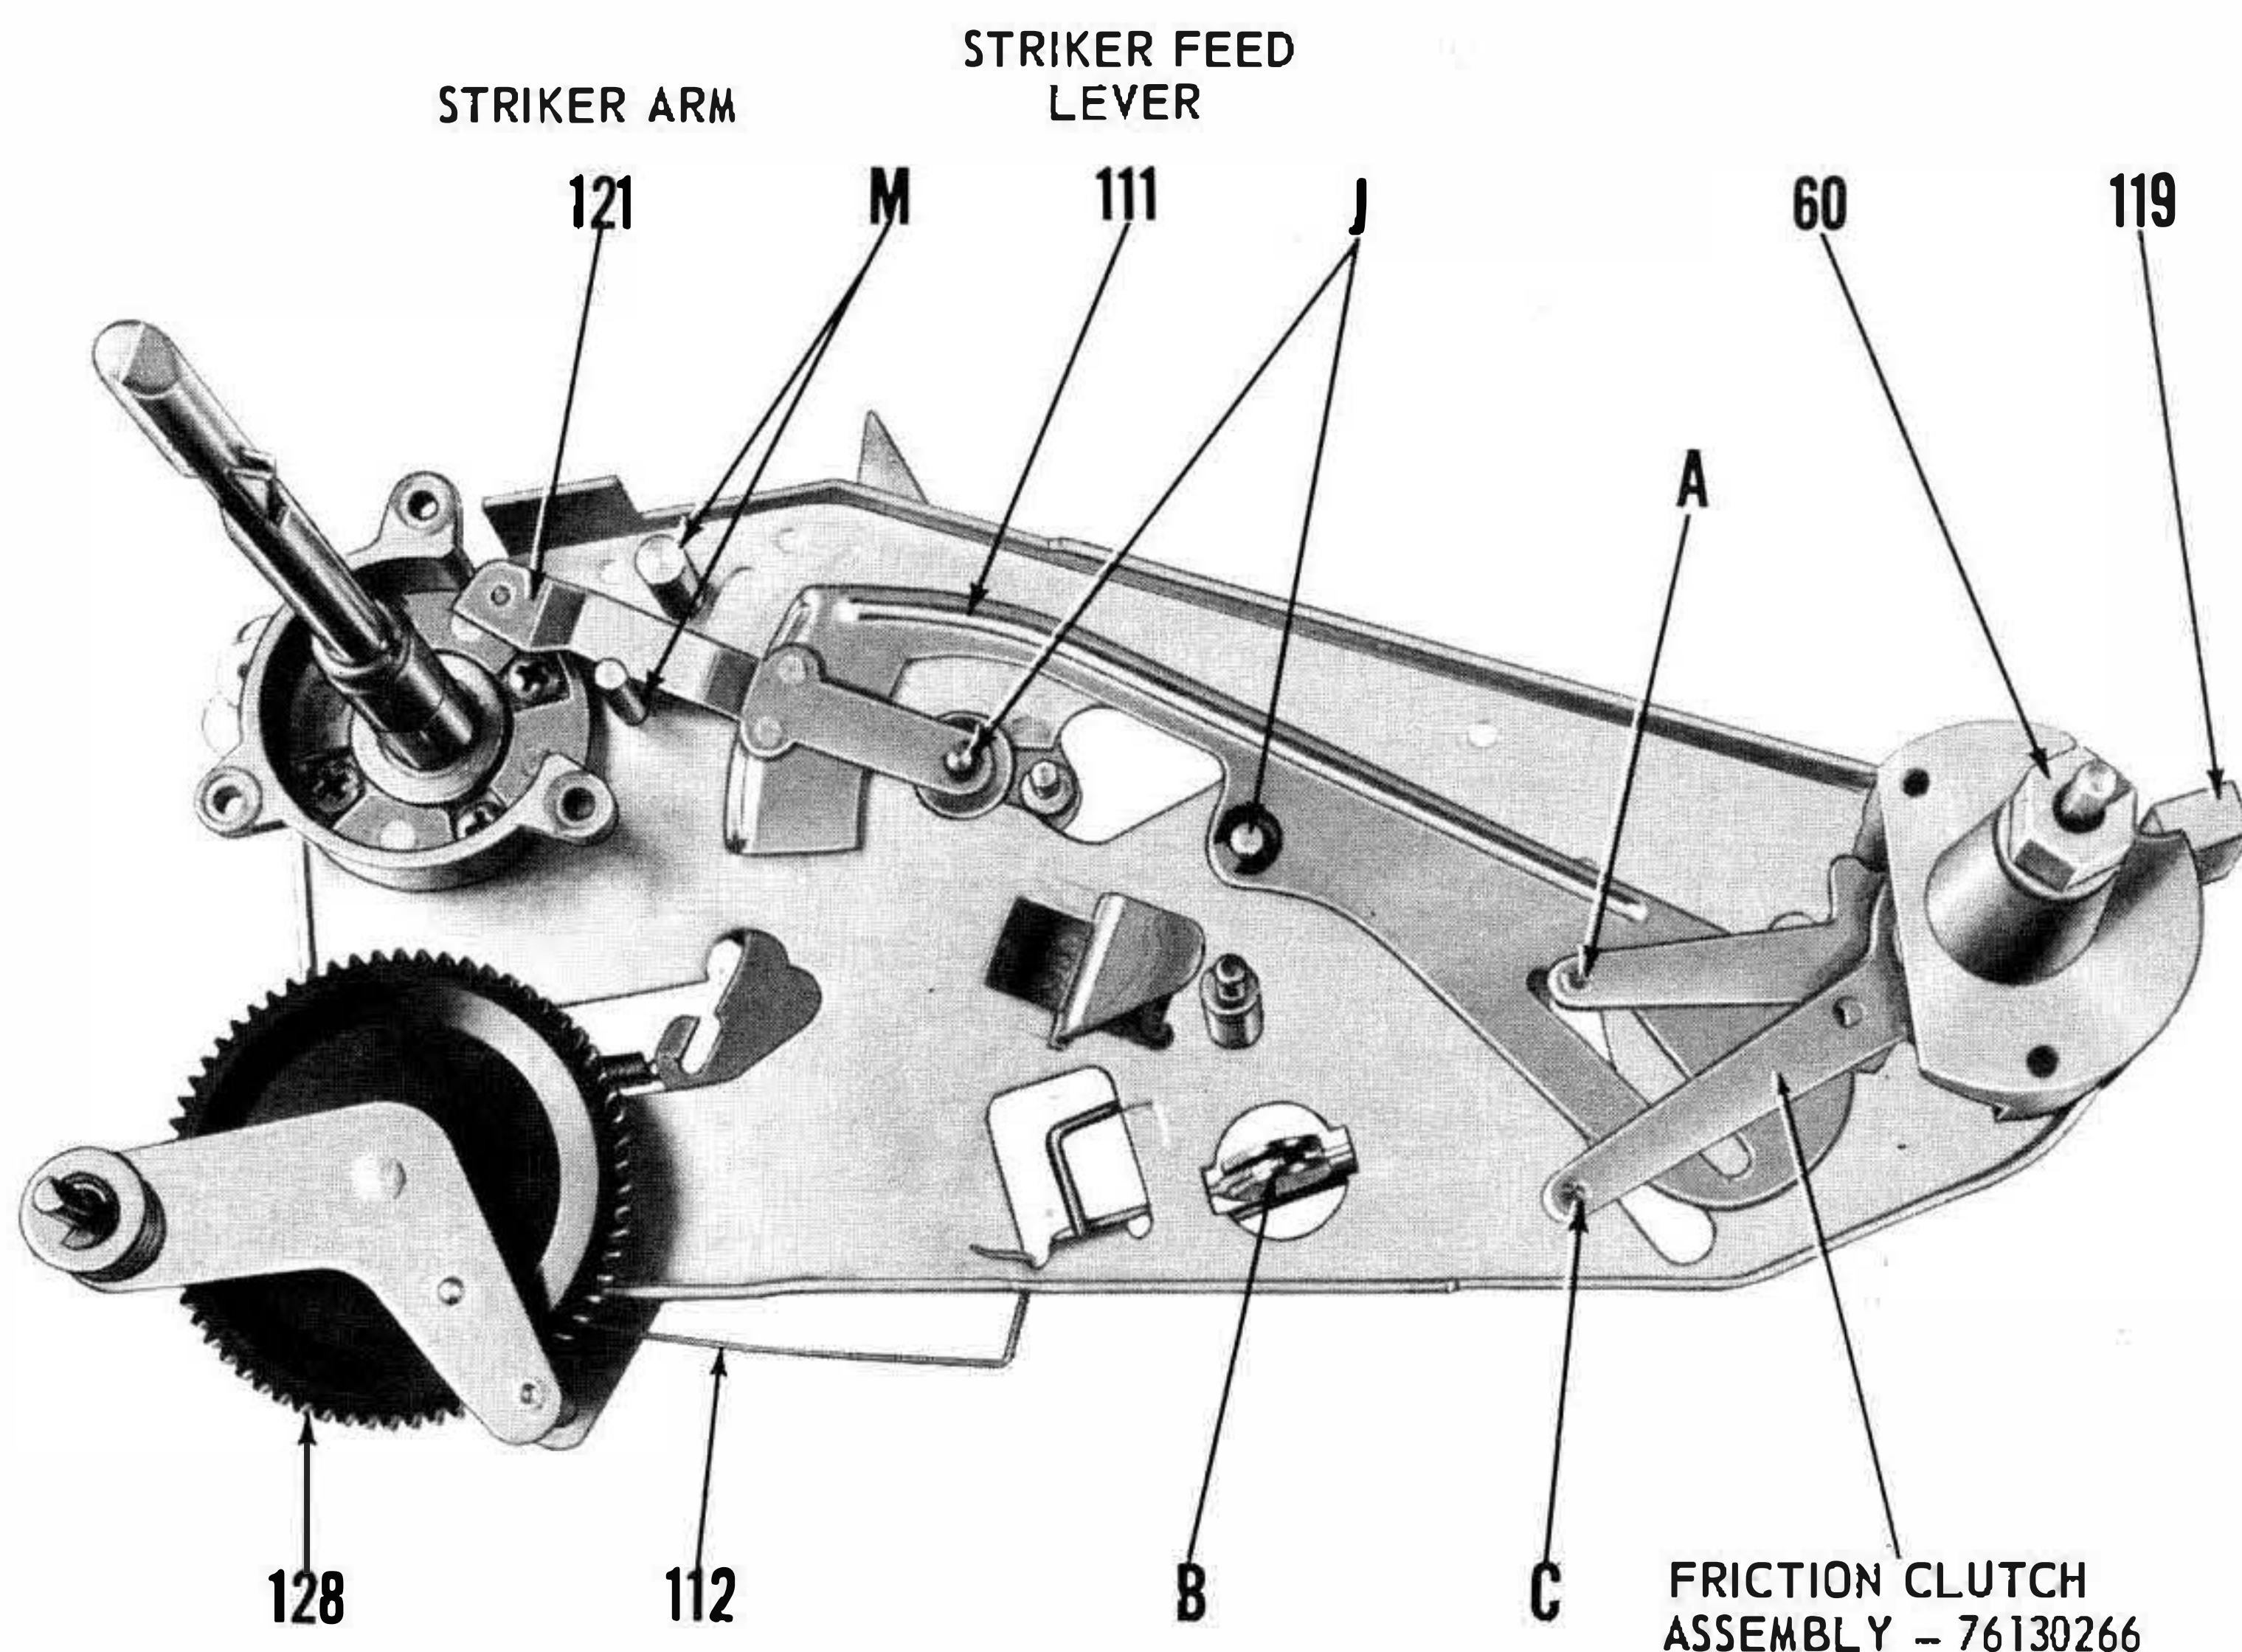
Sub-Plate Assembly with Cam Gear Removed
